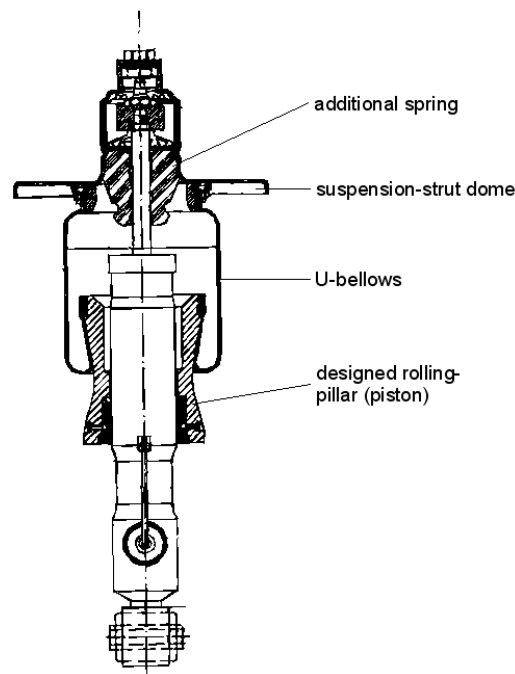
Gas spring and damper unit with U-type bellow
